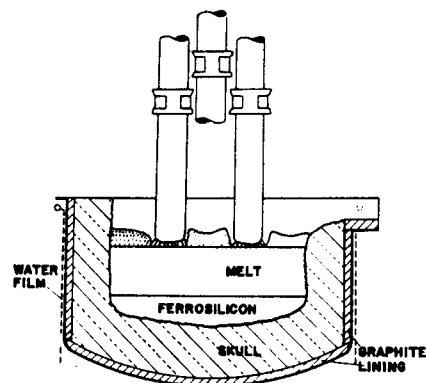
Cross section of pouring-type brown fused alumina furnace.
